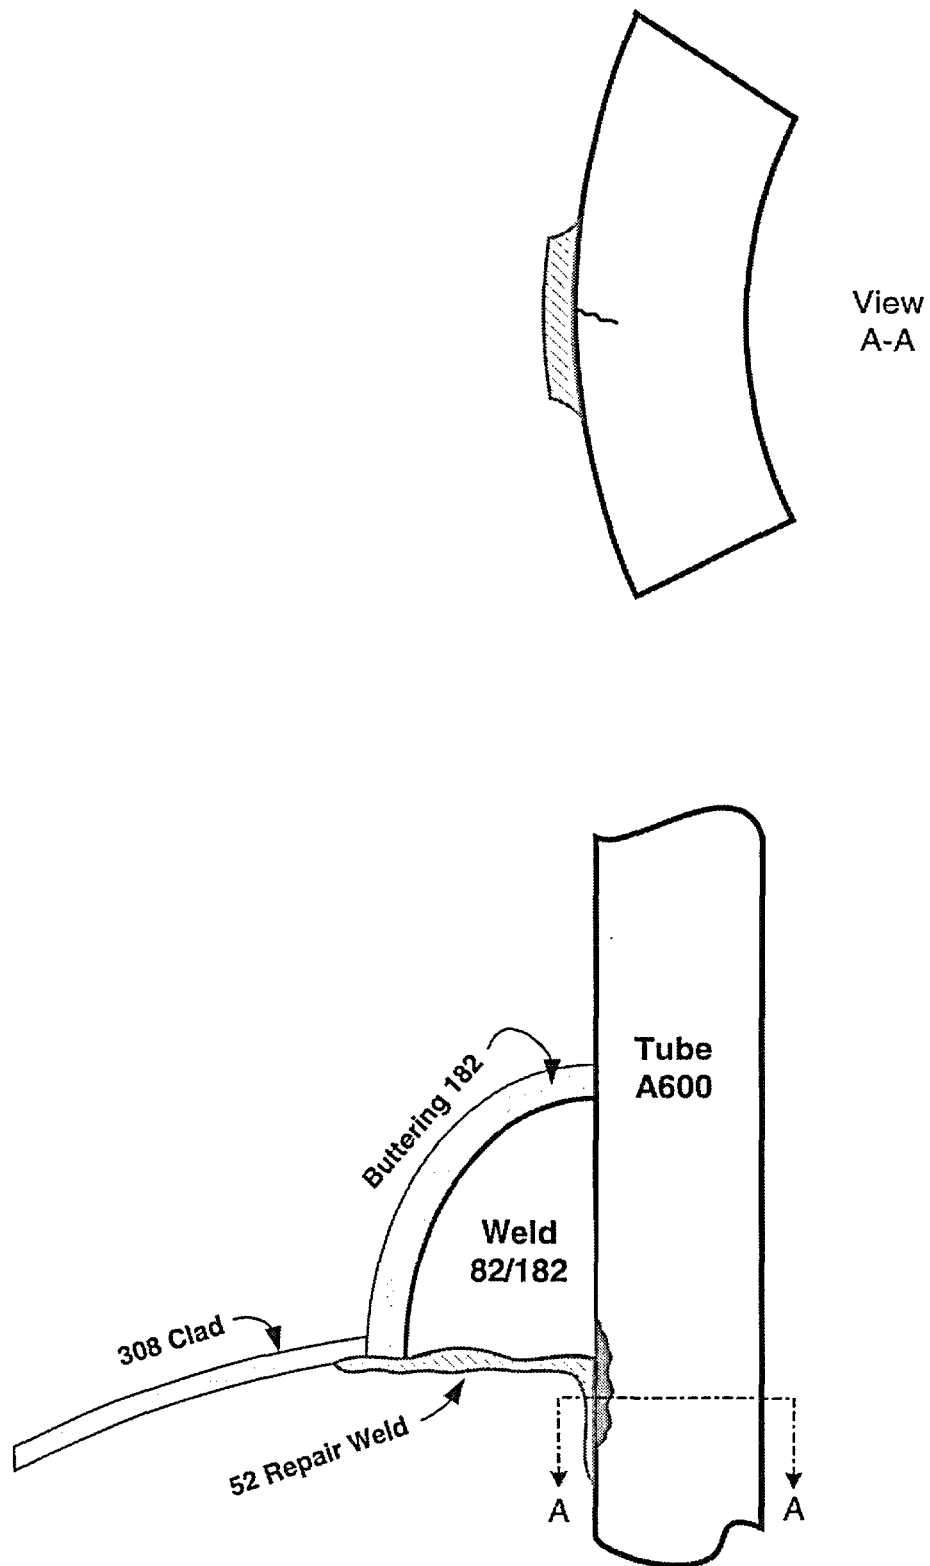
Application of the Embedded Flaw Repair to a Flaw in the Head Penetration Tube Outside Surface, or to a Flaw in the Attachment Weld (J-Weld)
